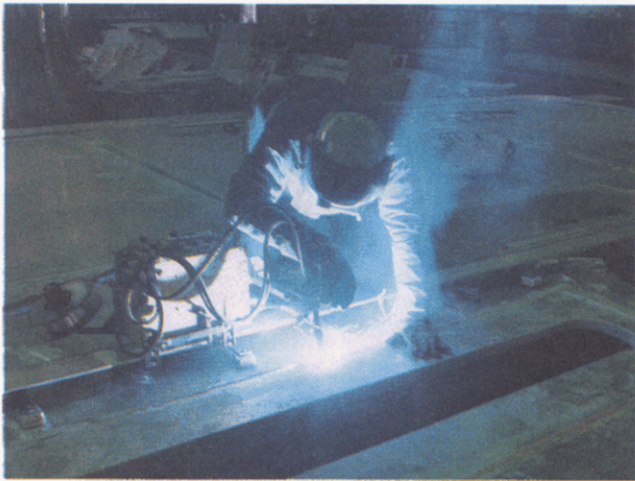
Mechanized Gas Metal Arc Welding Aluminum Superstructure in a Shipyard
